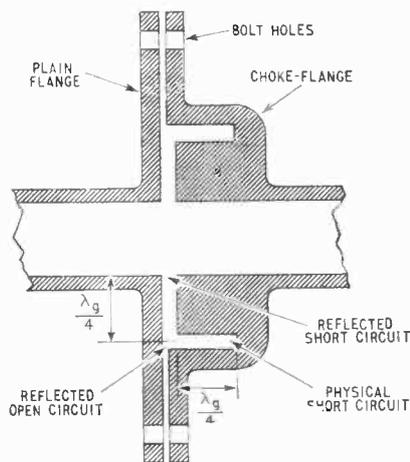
Cross-section through waveguide coupling showing choke flange.
